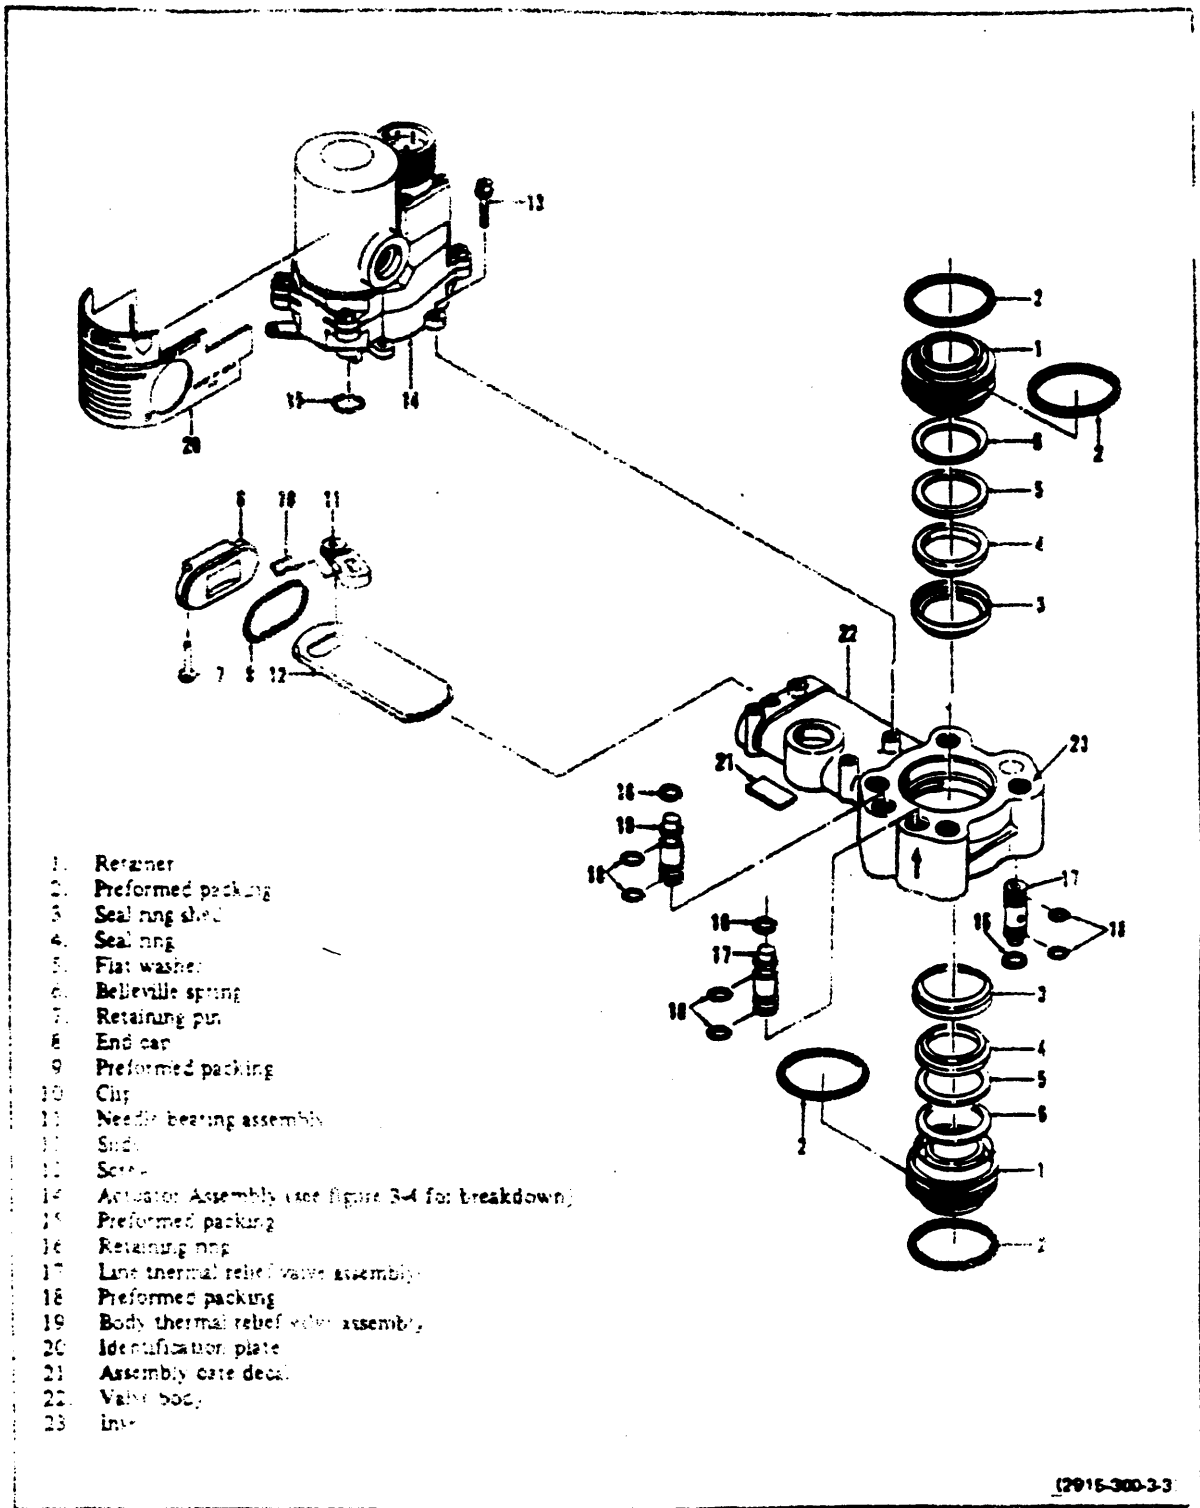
Gate Shutoff Valve Assembly, Part No. AV16B1700B
